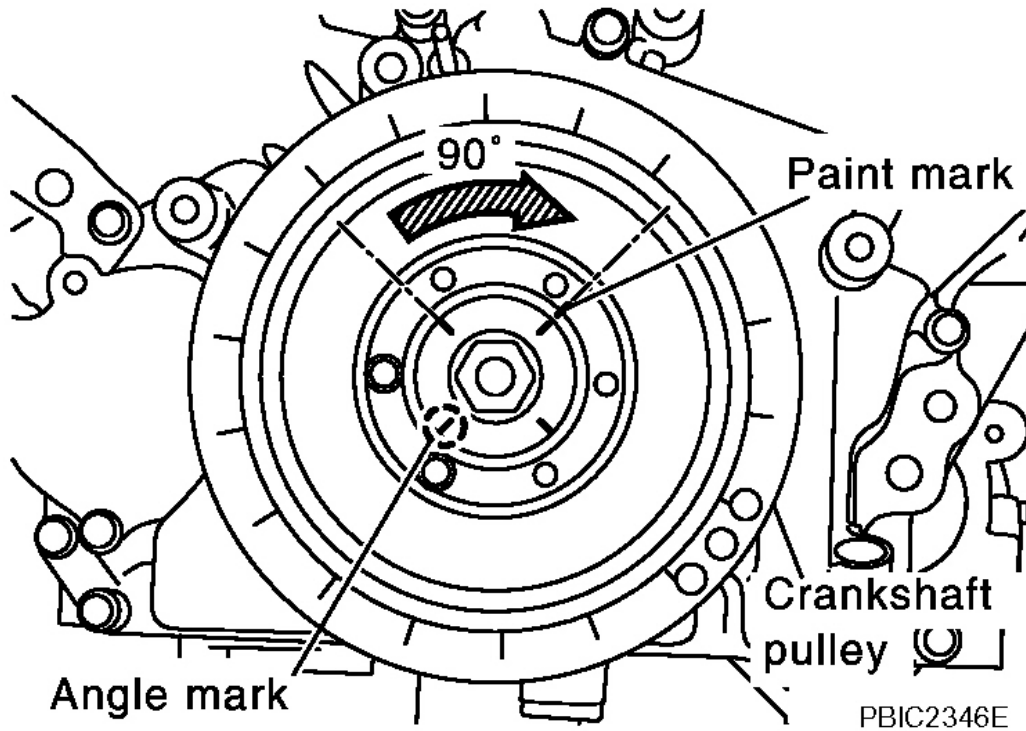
Rotating Crankshaft Pulley From Position Of No. 3 Cylinder Compression TDC
